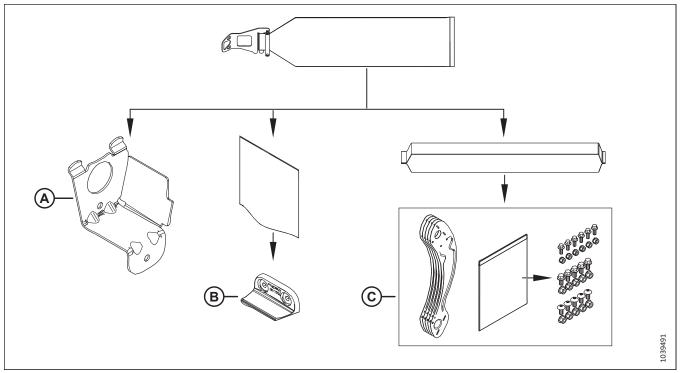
Reel Endshield Parts Bag MD #340985 - MD #340986 is Similar
